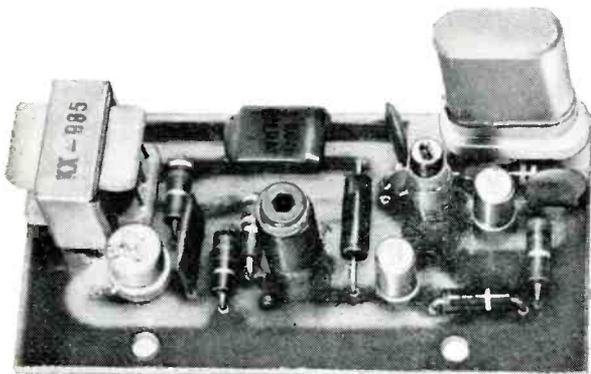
Parts mounted on board, including crystal holder. Leave $1/16$ " air space under transistors. Connect leads to board before installing in cabinet.
